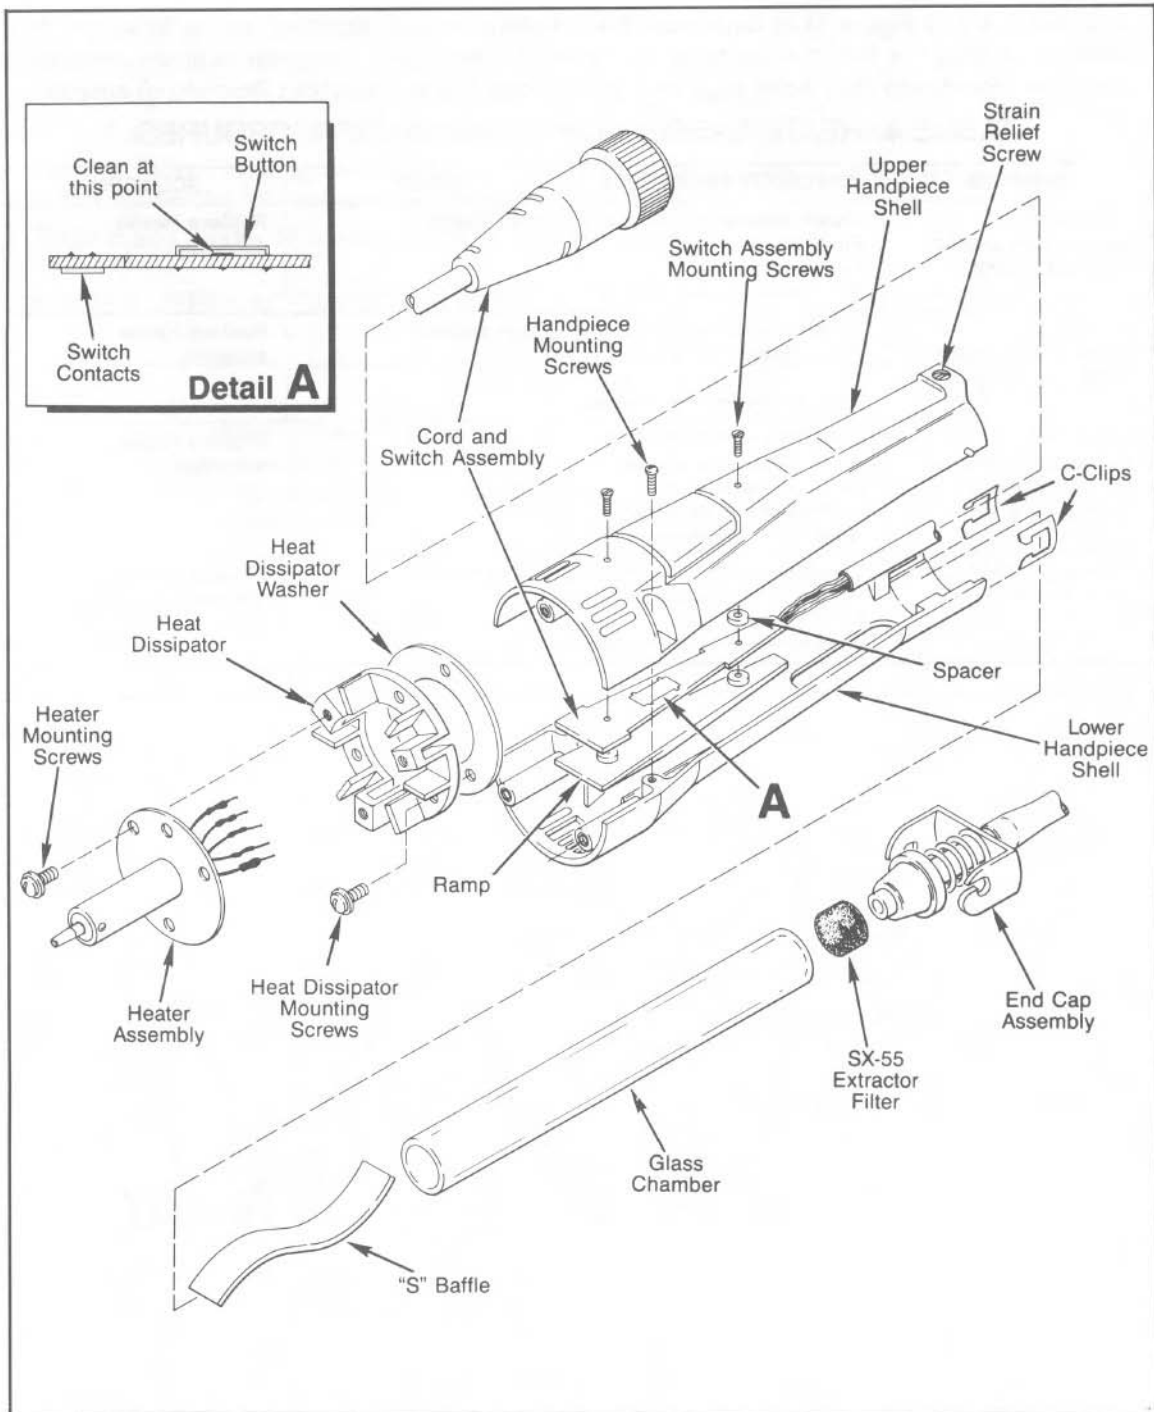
CLEANING AND REMOVAL/REPLACEMENT OF CORD AND SWITCH ASSEMBLY
